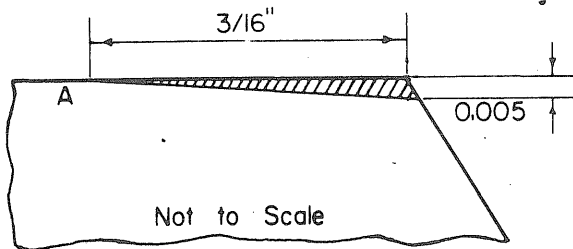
WELDING PROCEDURE PI30(T)-L140-A
